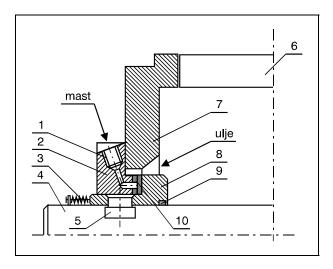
Block assembly: Sealing rings at mixer chamber; 1. central lubricator for grease, 2. divided ring, 3. mechanism for clearance adjusting, 4. mixer armature shaft, 5. plug for ring locating, 6. mixer piston, 7. mixer chamber side, 8. divided bushing, 9.sealing ring, 10. contact surfaces
